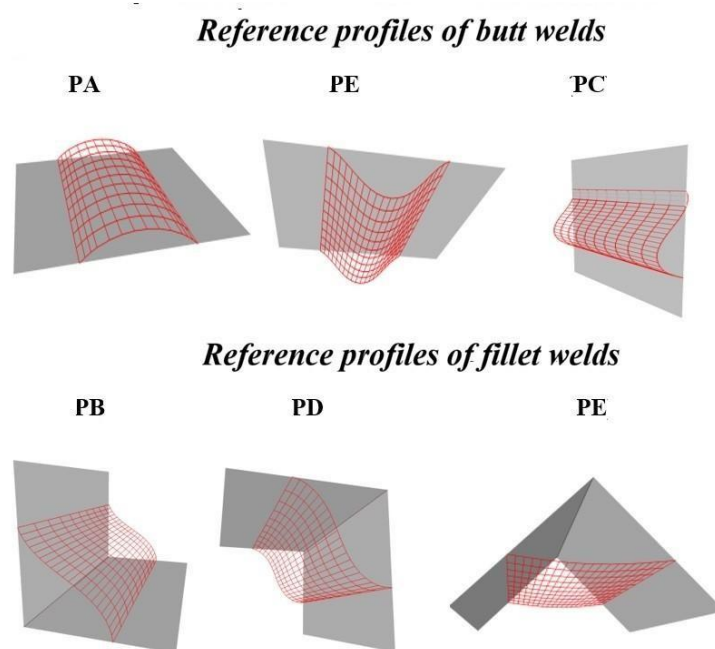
Calculated surface references for butt and fillet welds in various spatial positions (ISO/AWS standards: PA/1G, PE/4G, PC/2G, PB/2F, PD/4F)
